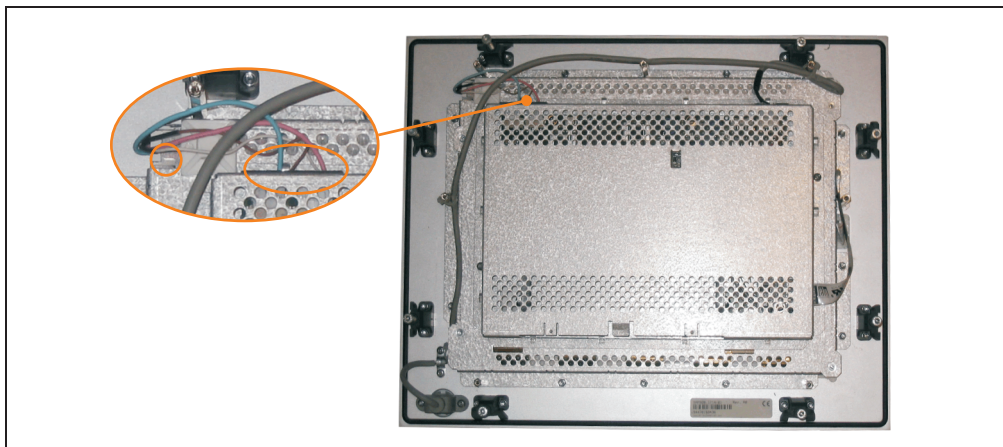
12.1" Automation Panel - Unscrew and unplug
